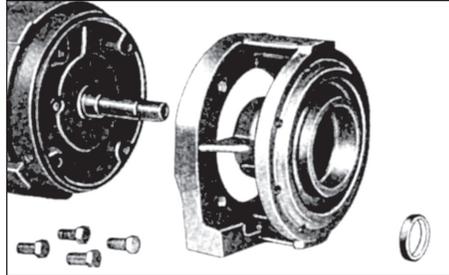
Fig. E. Bracket, Seal Flexible Cup and Stationary Seal Removed.
